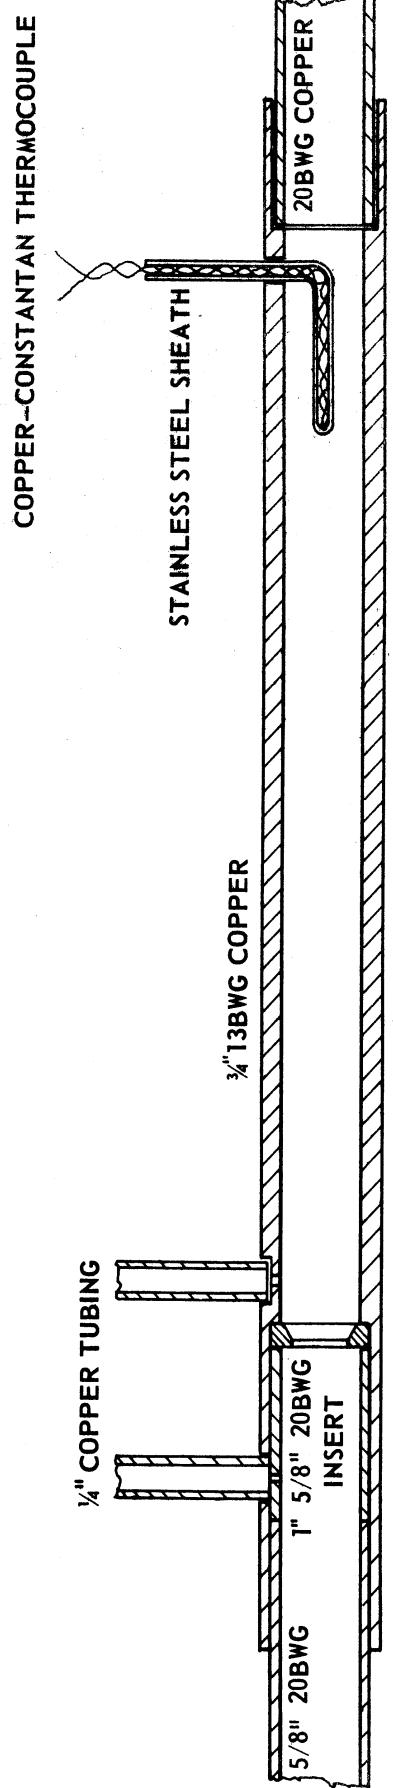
Cross-Sectional Drawing of Orifice Holder Assembly
